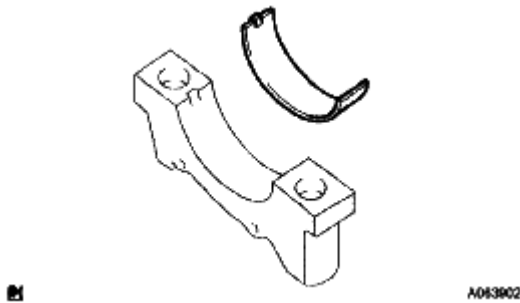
Identifying Lower Main Bearings And Main Bearing Caps
